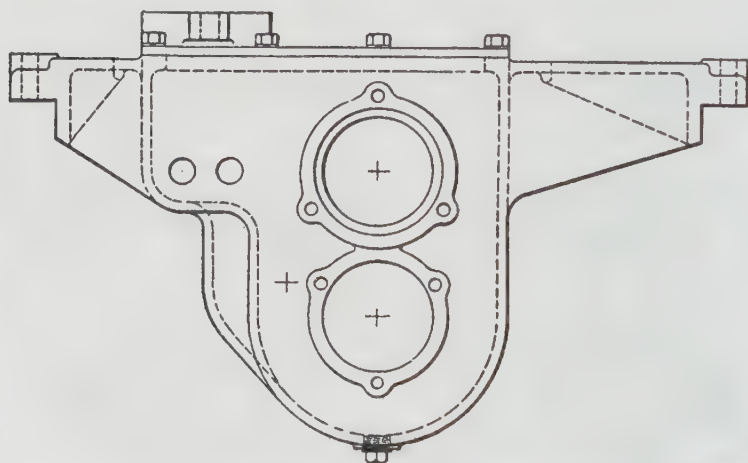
ONE-PIECE GEAR CASE WITH GEAR SHAFTS IN VERTICAL PLANE.
